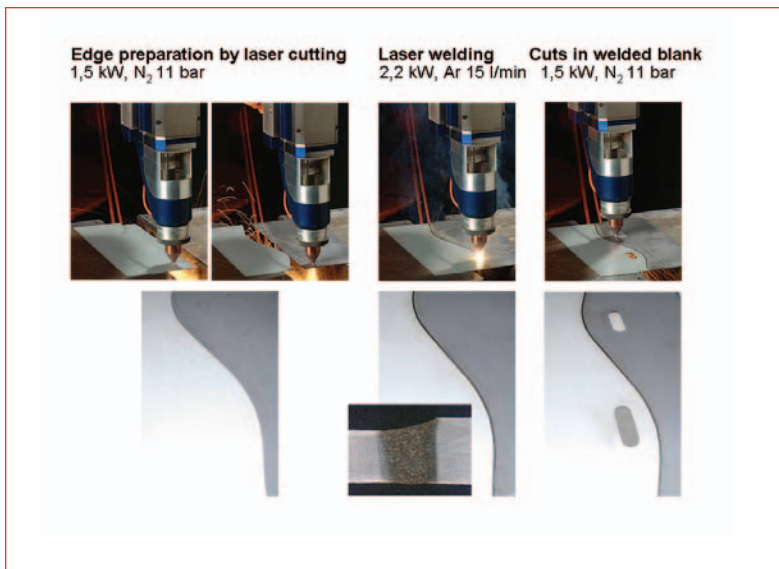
Specimen of nonlinear tailor-welded blanks from coated steel (1 mm/1.2 mm), combi-processed with the identical path concept on a 6-axis articulated robot without teaching or joint tracking in a moderate power range of 1.5–2.2 kW and at a processing speed of 8 m/min.
